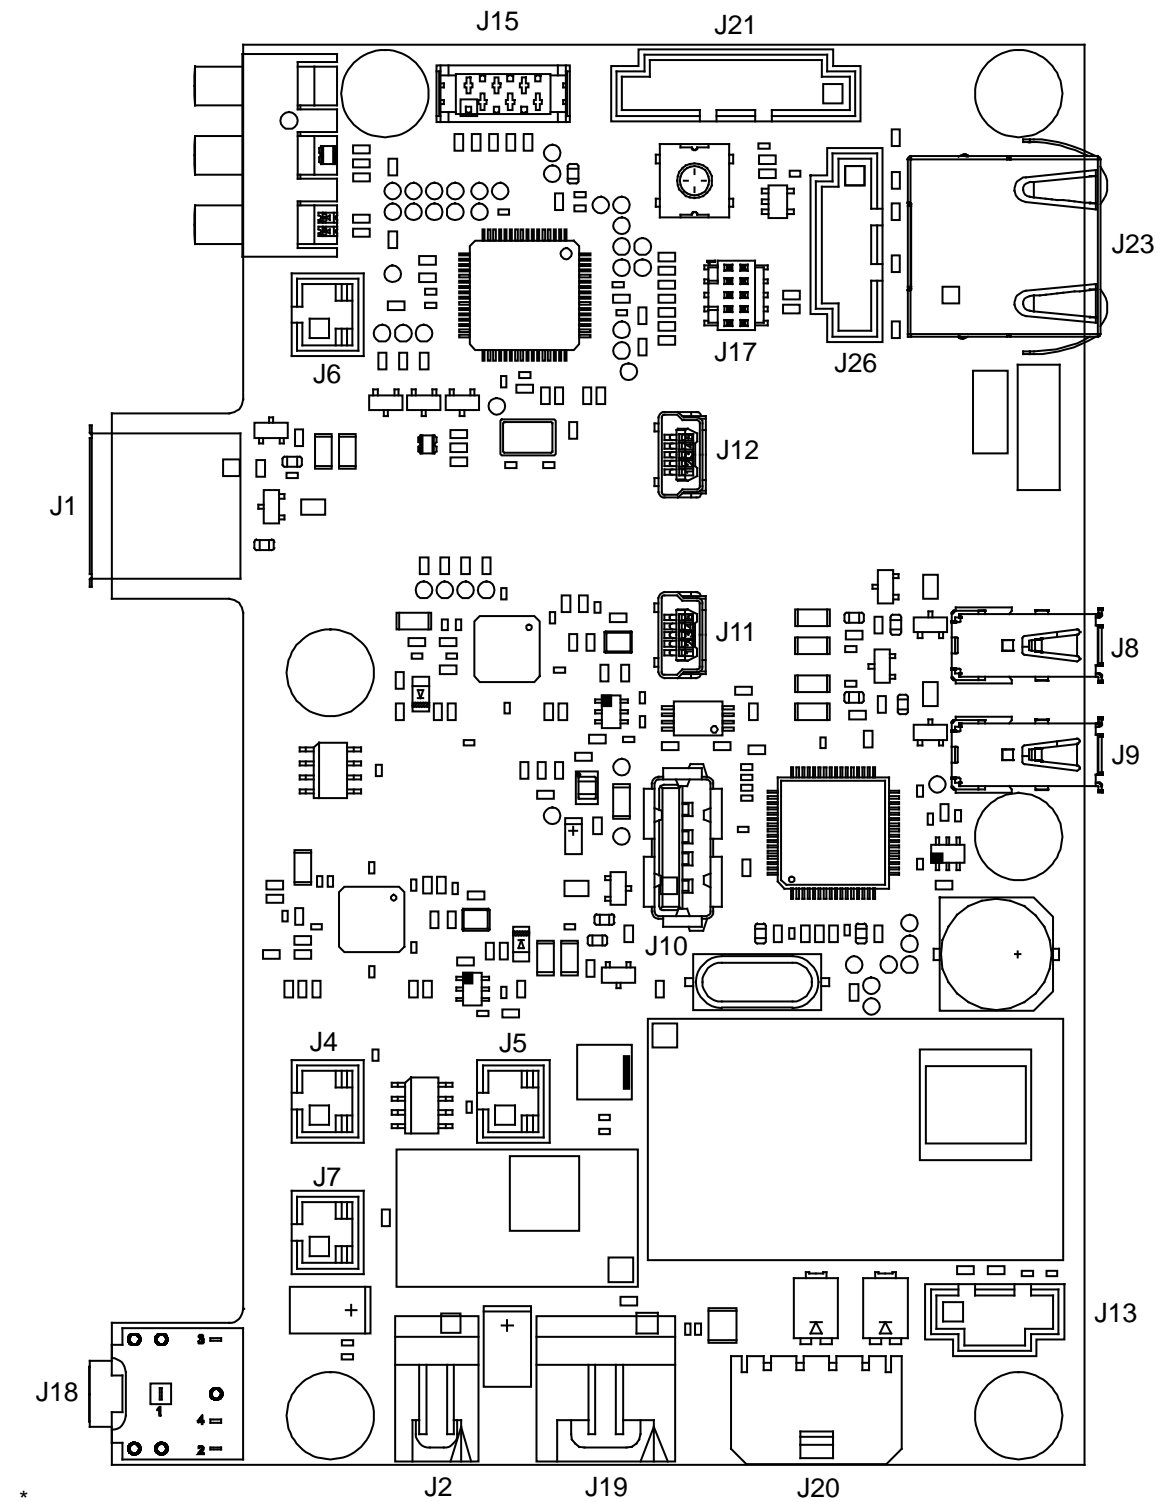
Audio I/O PCB Assy (Sheet 1 of 2)
